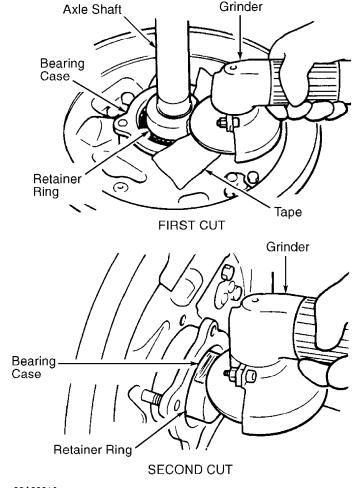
Grinding Bearing Retainer Ring (Pickup & Ram-50) Courtesy of Mitsubishi Motor Sales of America.
